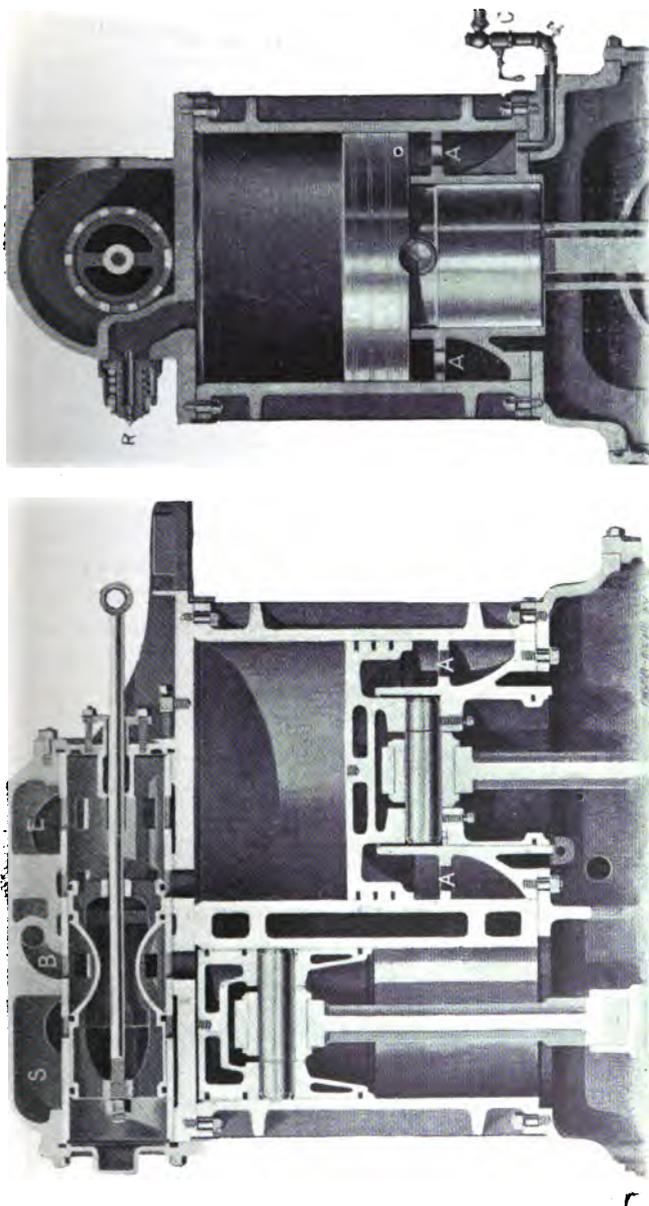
DETAIL OF CYLINDERS, PISTONS, STEAM CHEST AND VALVES.
